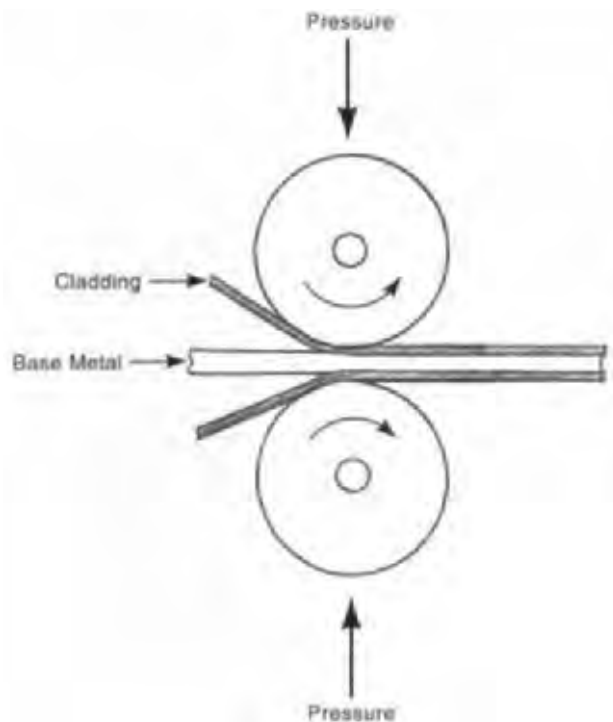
C13e Roll welding (roll bonding) (ROW).
